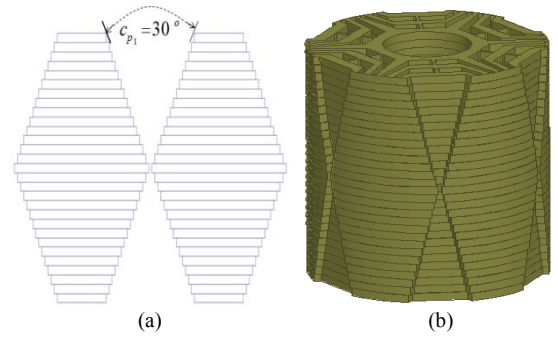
Proposed model (a) cross-section of axially sinusoidal lamination shape, (b) 3D view of the rotor core.
